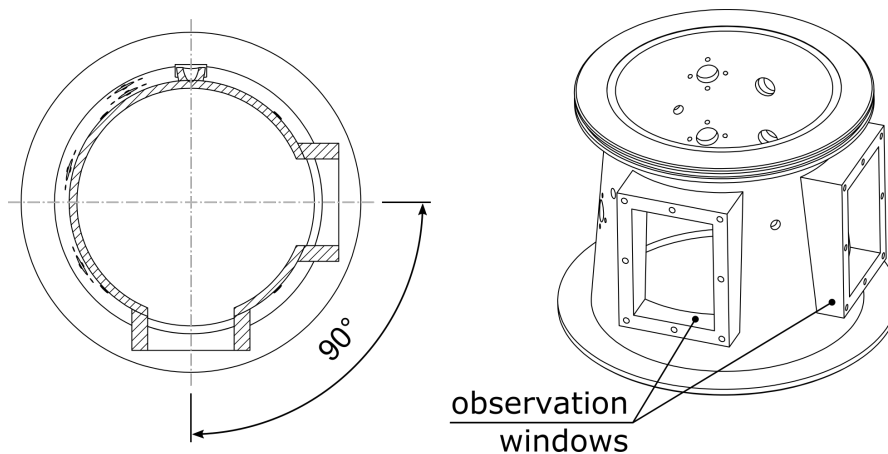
Draft tube cone 2 - cross sectional view (left) and 3D view (right)
